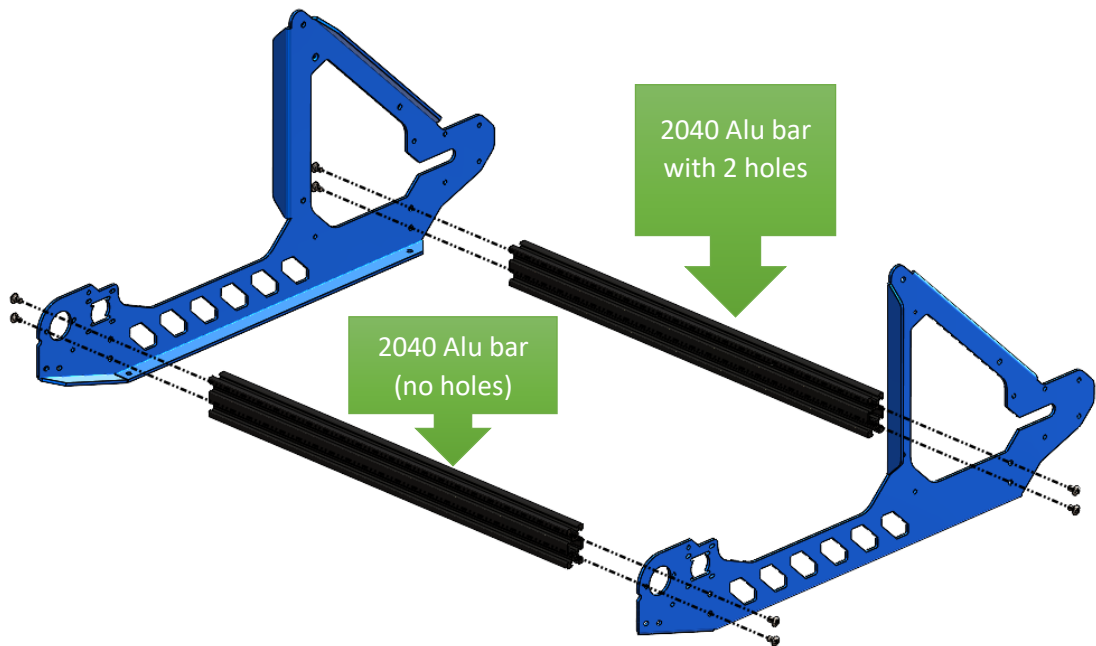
Fix the side plates using M5x8 screws, 4 on each side
